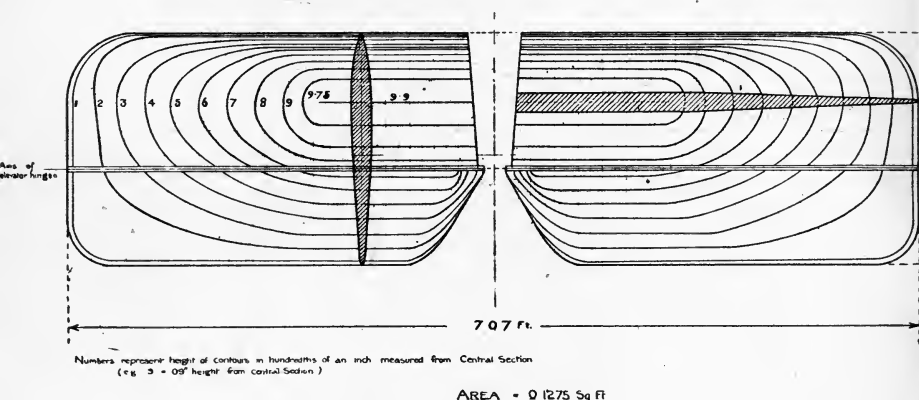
Contoured Plan and Sections for Tail Plane 3.
